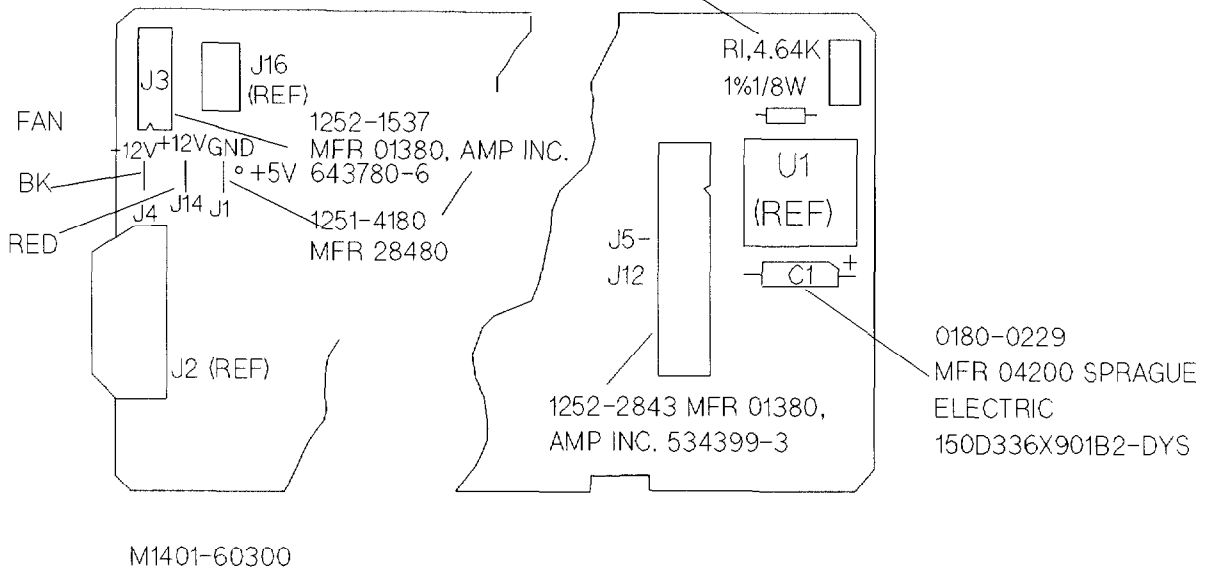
Receiver Backplane Assembly M1401-60300, Replaceable Parts and Pinouts
